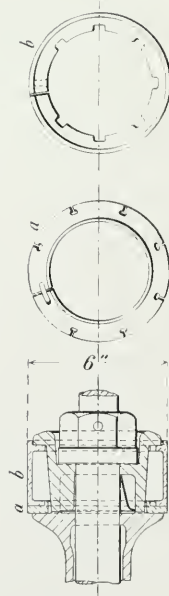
7"-Piston Valve fitted to a Compound Passenger Engine, 1888.
